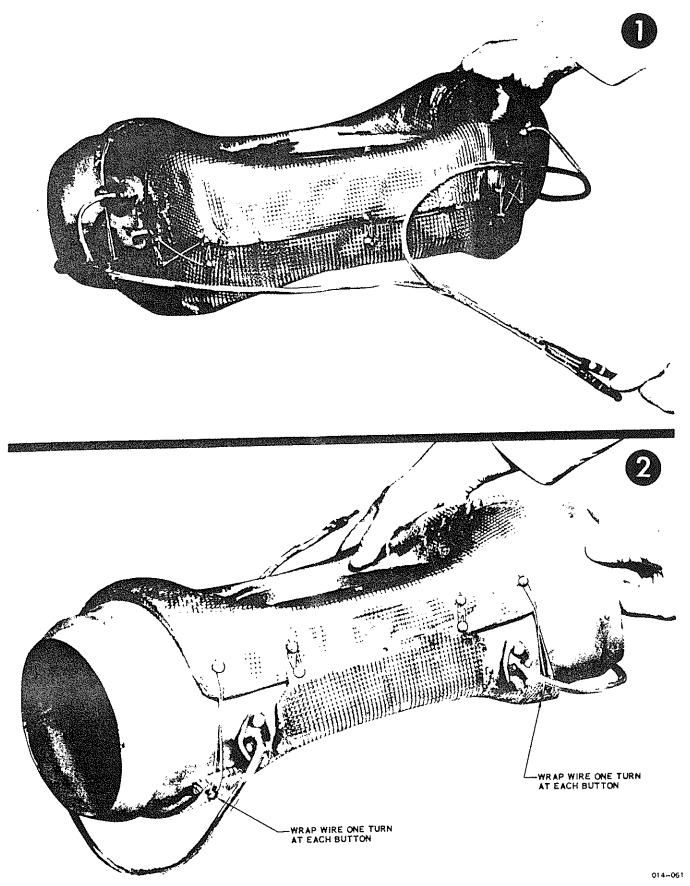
Lockwiring Exhaust Collector Insulation Blankets
